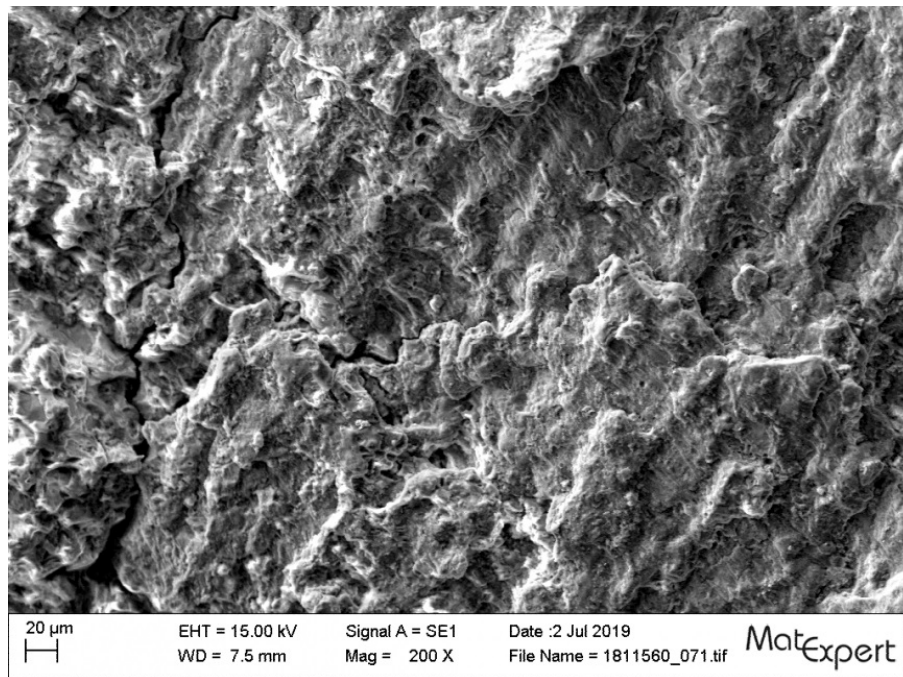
Close-up – crack surface in the exposed crack with fatigue fracture and intergranular cracks.
